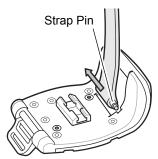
Strap Pin Removal (Trigger Swivel Assembly)
